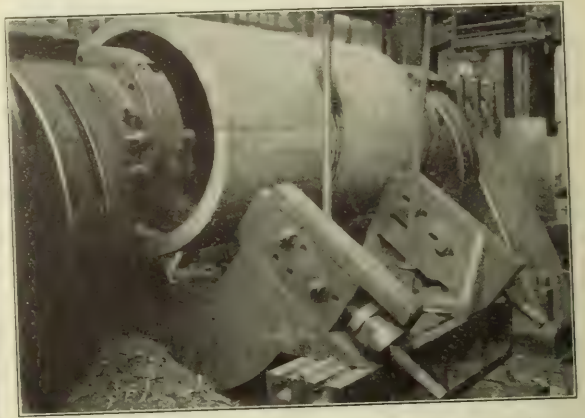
A Cylinder Bushing About to be Clamped Preparatory to Boring.
